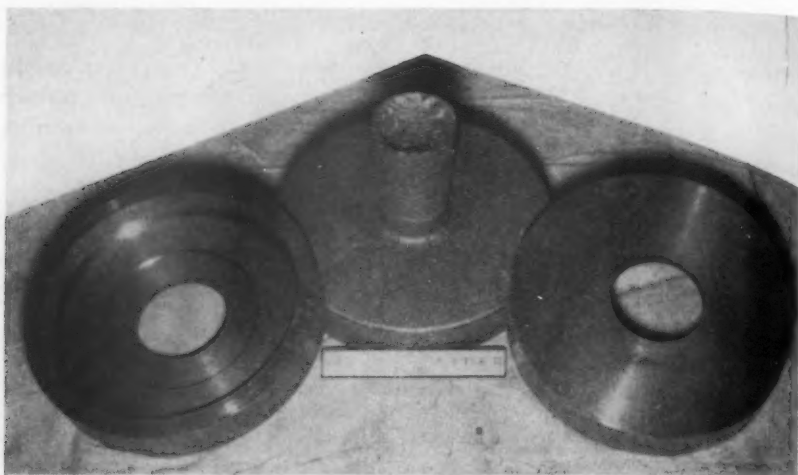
FLY-WHEEL CASTING MADE SEMI-CENTRIFUGALLY, CENTER—AS-CAST, OUTSIDE—MACHINED.
